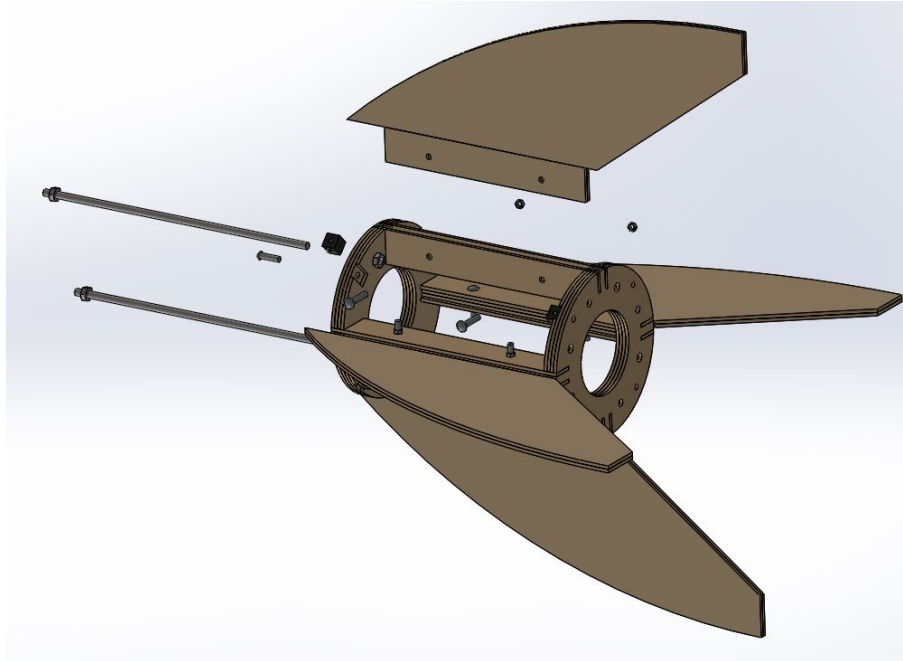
Exploded view of the removable fin assembly. A fin is bolted to the runners between centering rings. Threaded rods re-inforce the entire assembly
